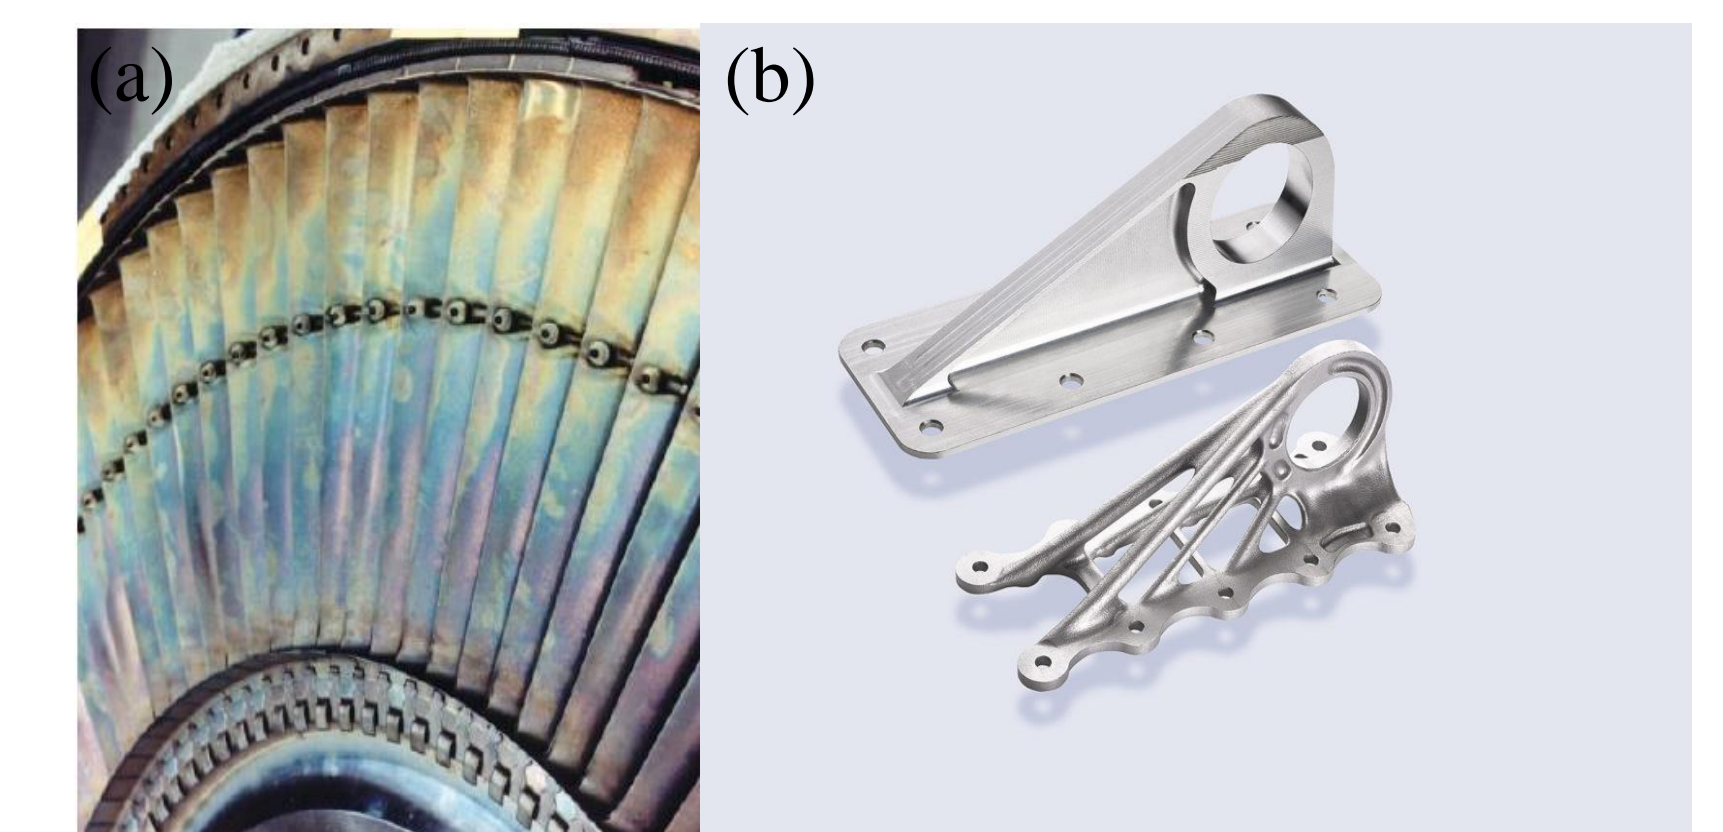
Ti alloy a) turbine blades and b) wing brackets.
